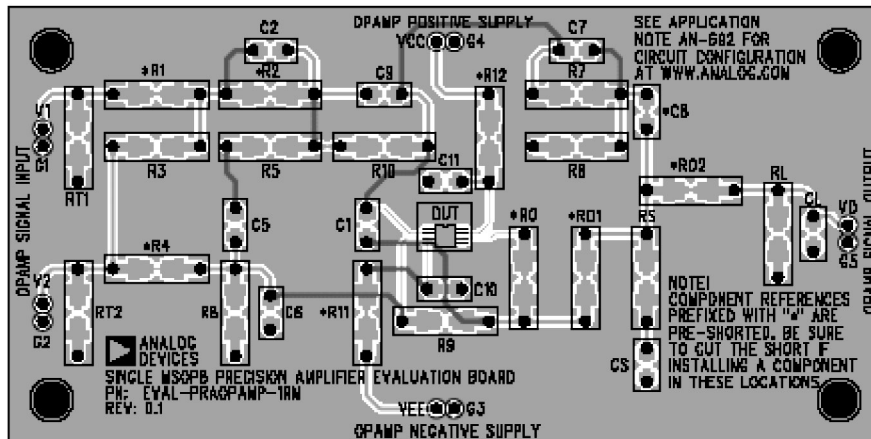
EVAL-PRAOPAMP-1RM Board Layout Patterns
